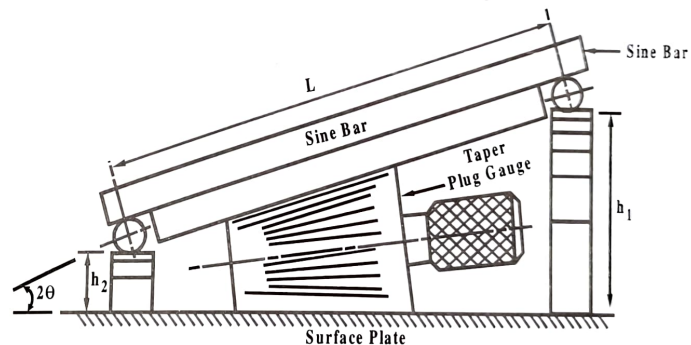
Measurement of Taper Angle of Taper Plug Gauge
